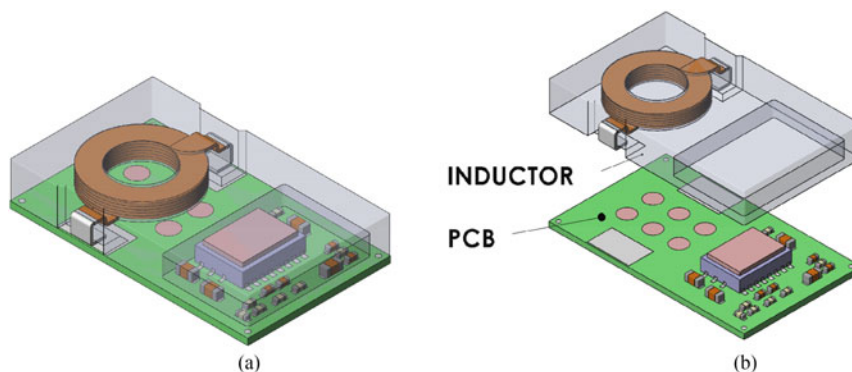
Proposed magnetic packaging. (a) Magnetic packaging power module. (b) Internal structure.
